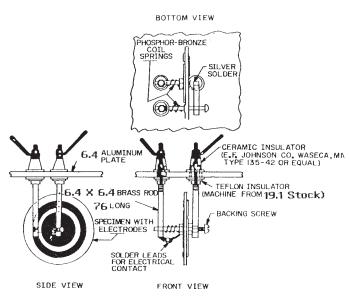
Standard Test Specimen Drilled for Three Pairs of Electrodes—Dielectric Breakdown Test
